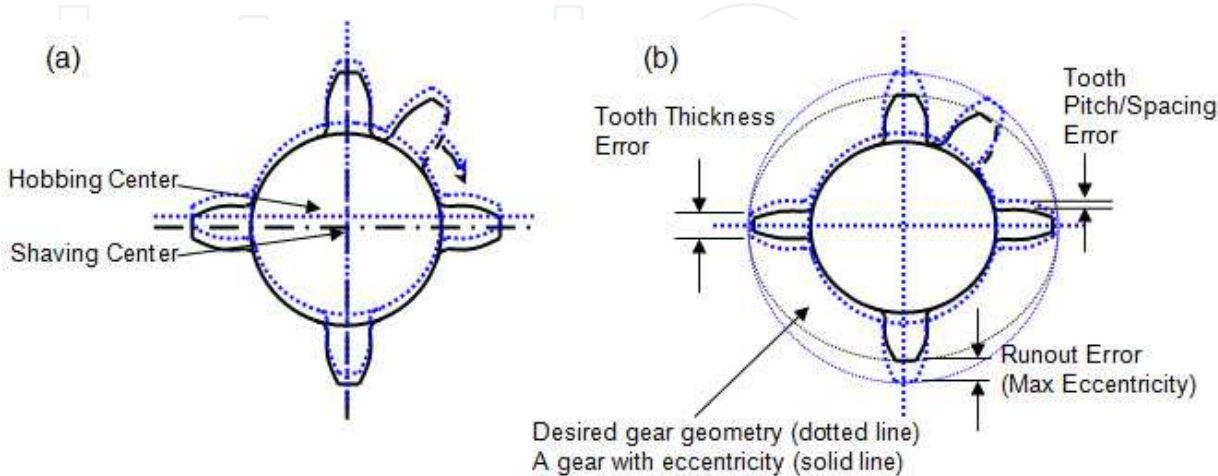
(a) Eccentricity in a gear caused by manufacturing errors, (b) Resulting errors in gear geometry.
